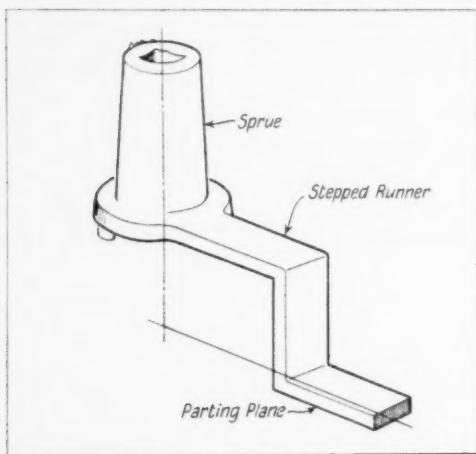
By Recessing the Sprue Assembly into the Fixed Die Member, a Short Sprue with a Stepped Runner can be Provided Even in a Deep Die Block
